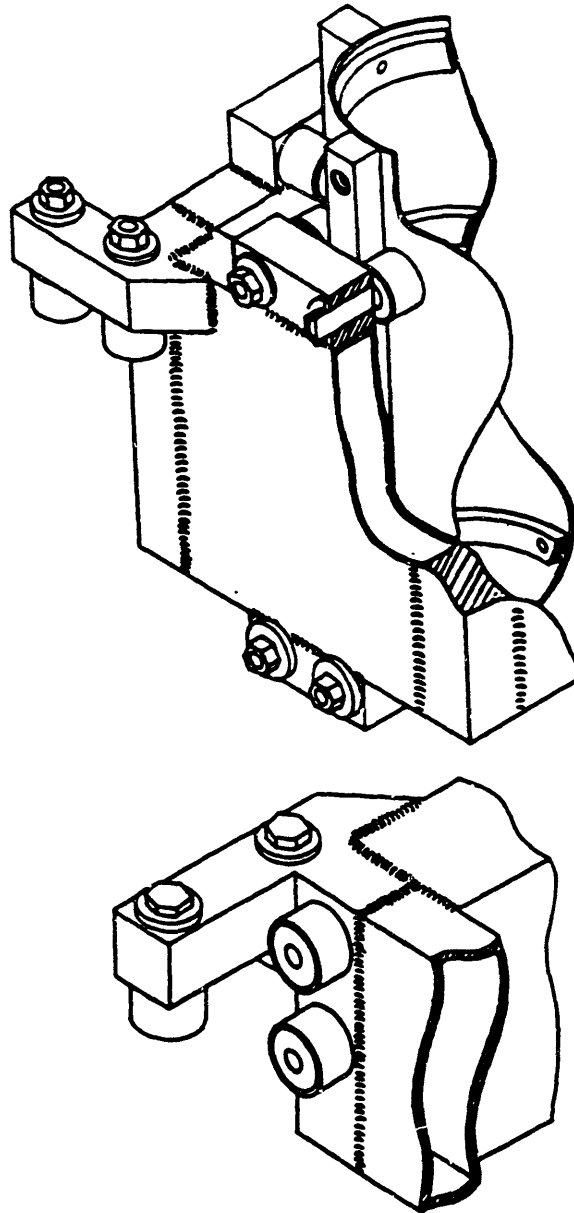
Construction Details of the X, Y, and Z Axes - The top drawing shows the Z axis tube cut away to display the rings used for internal stiffening and way attachment. The Y axis in the top drawing and the X axis in the bottom drawing are cut away to show their monocoque construction.
